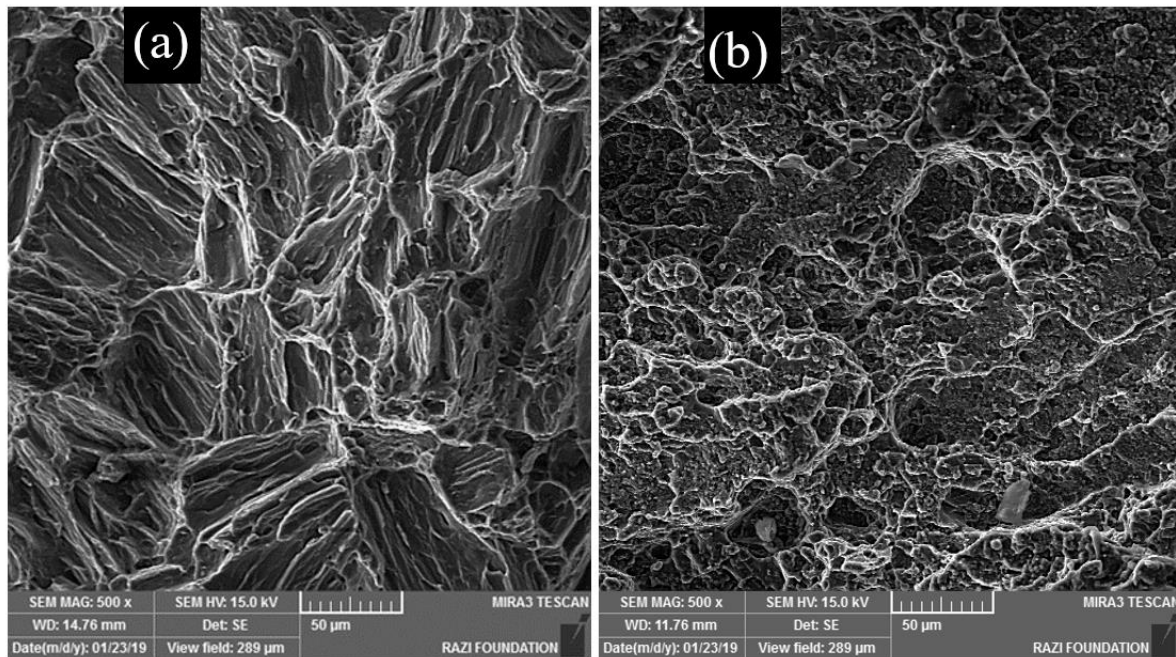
Failure mapping of the fracture surface of the samples (a) TIG, (b) TIG/FSP.
